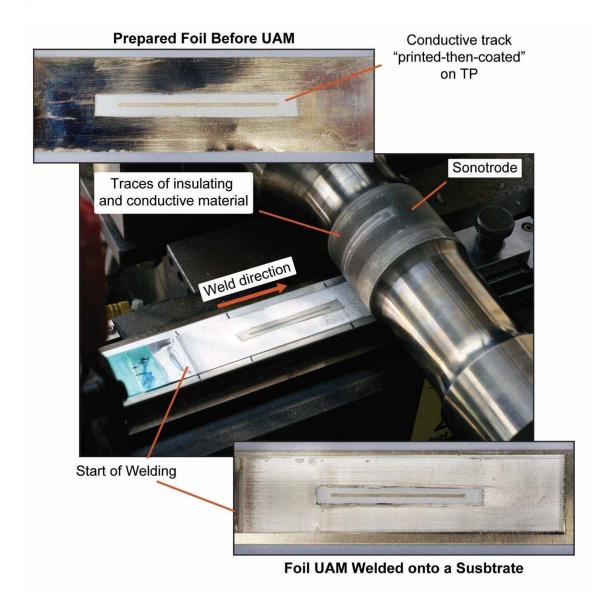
Example of UAM welding of a foil coated with TP+TS1 and using the print-then-coat approach.
